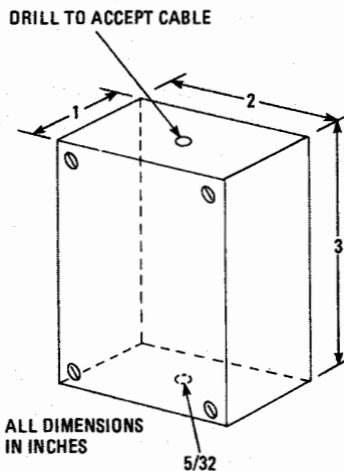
THE AIR TEMPERATURE sensor is mounted in a box with these dimensions and mounted outdoors.
